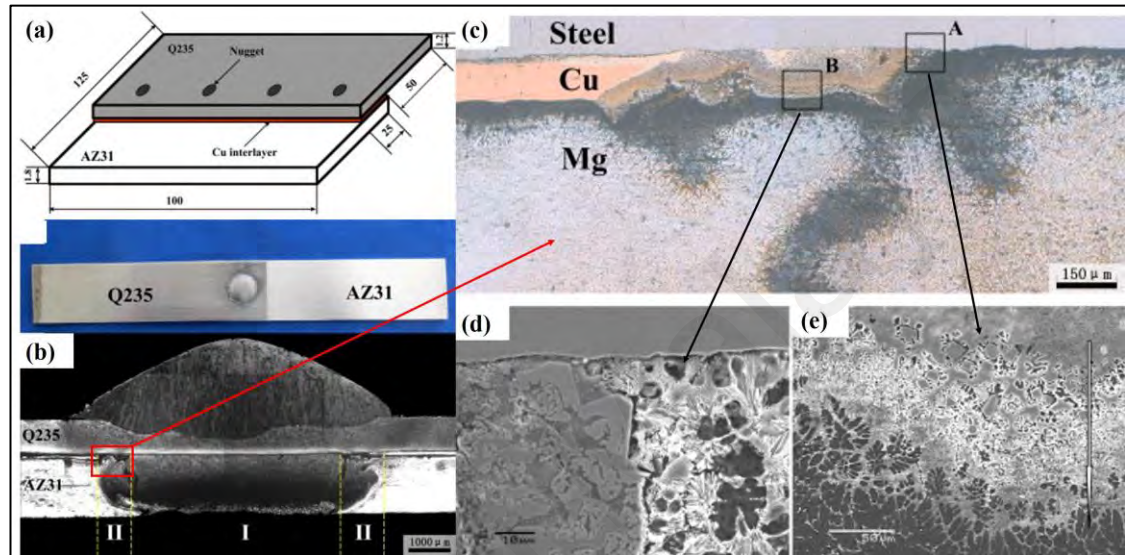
(a) Welding arrangement with Cu interlayer (b) nugget zone macrograph and cross-section (c) SEM image of nugget edge (d,e) magnifying view of two different locations in nugget edge (Ren & Liu, 2017)
